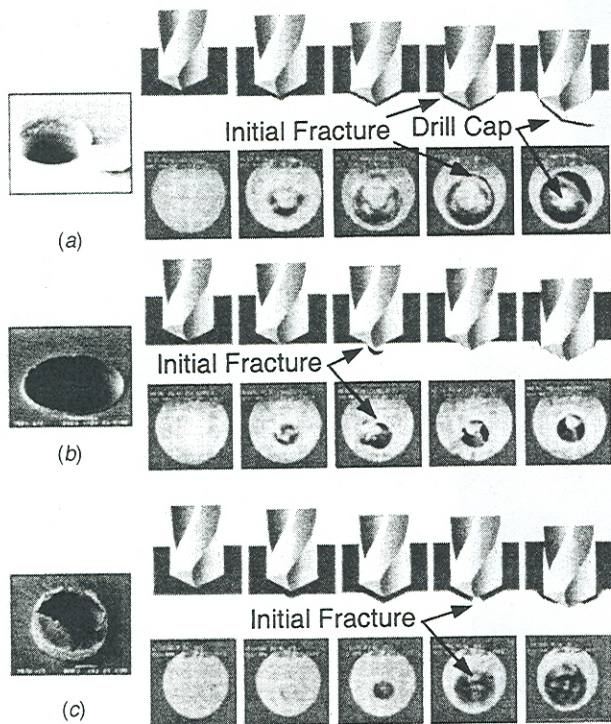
Burr formation mechanisms matched with high-speed video pictures [8,13]. (a) Uniform burr with a drill cap, (b) uniform burr without a drill cap, (c) crown burr.
